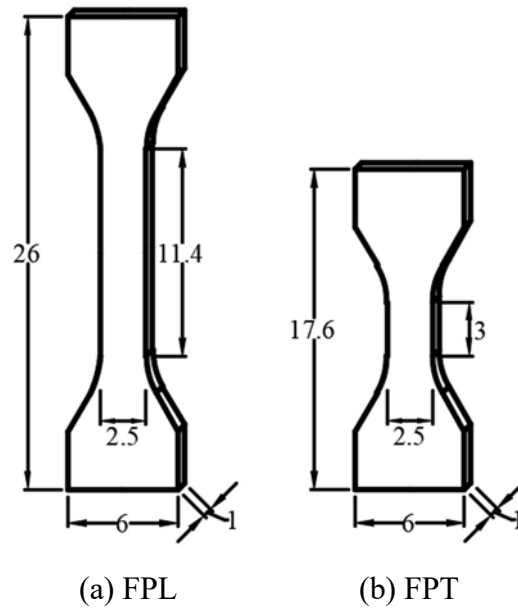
Geometry and dimension of miniature FP coupons (mm).
